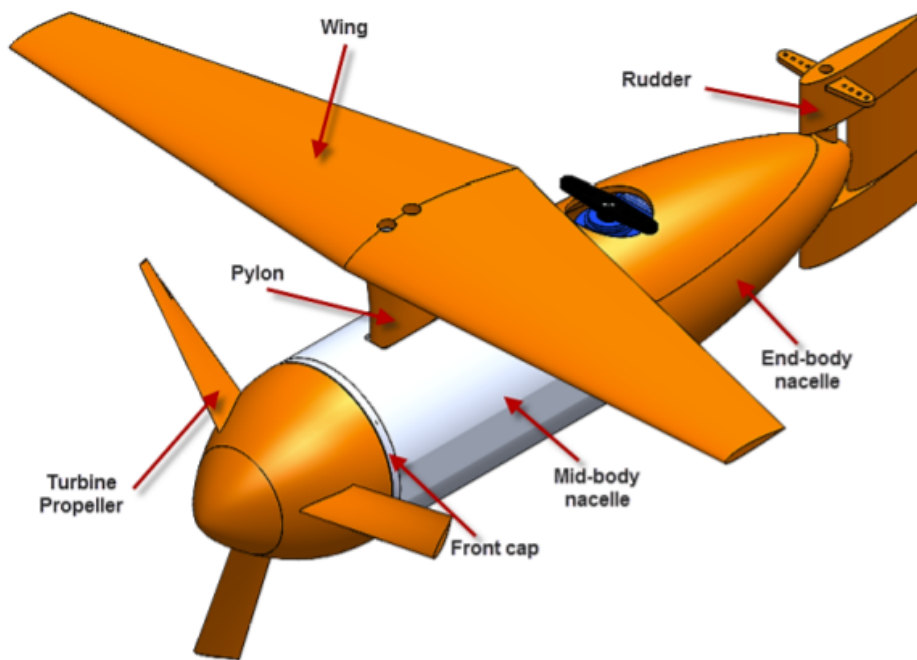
Isometric View of CAD Drawing of Hydro-Kite (Aye-Addo et al., 2014)
